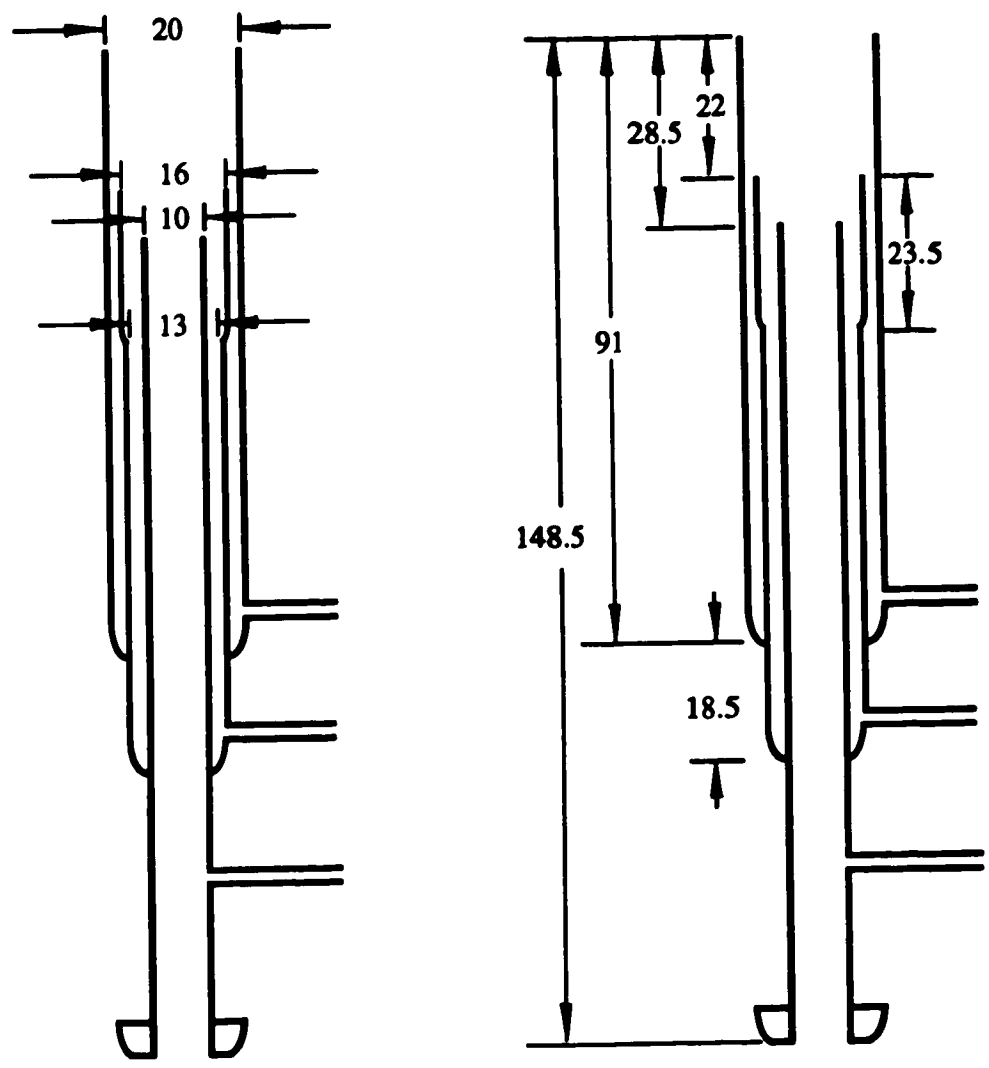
Dimensions of the DSI-ICP torch in mm.
